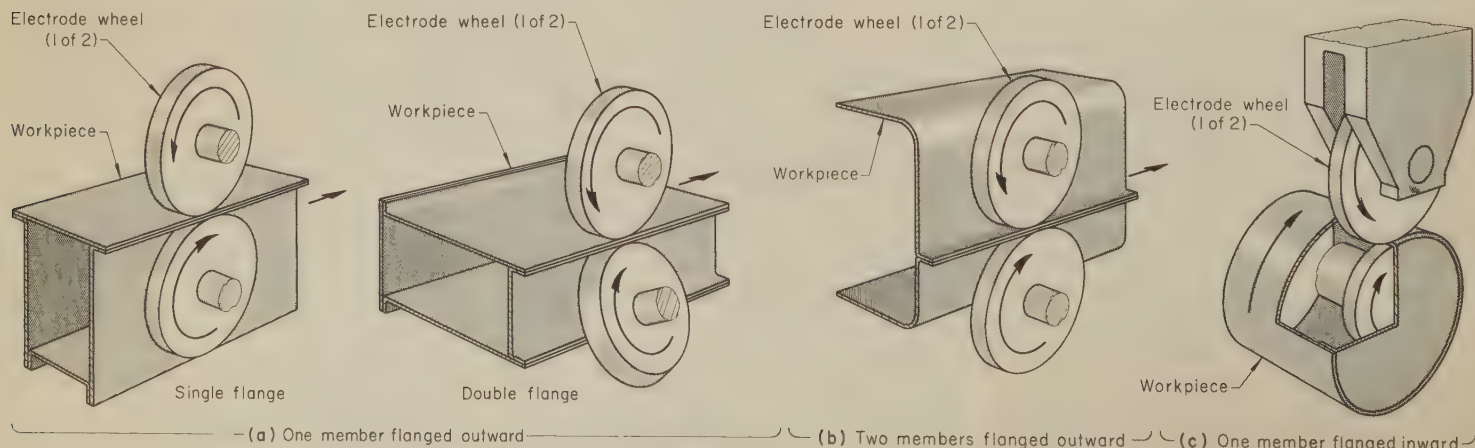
Typical arrangements of electrode wheels for making various types of flange-joint lap seam welds
